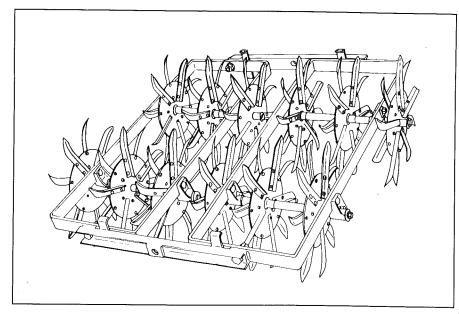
Auxilliary frame sections of a rotary hoe equipped with spider wheel gangs.
